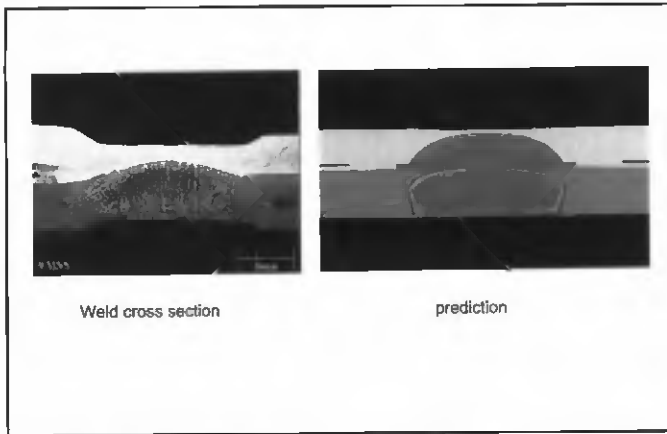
Weld structure at the end of the third welding pulse.
